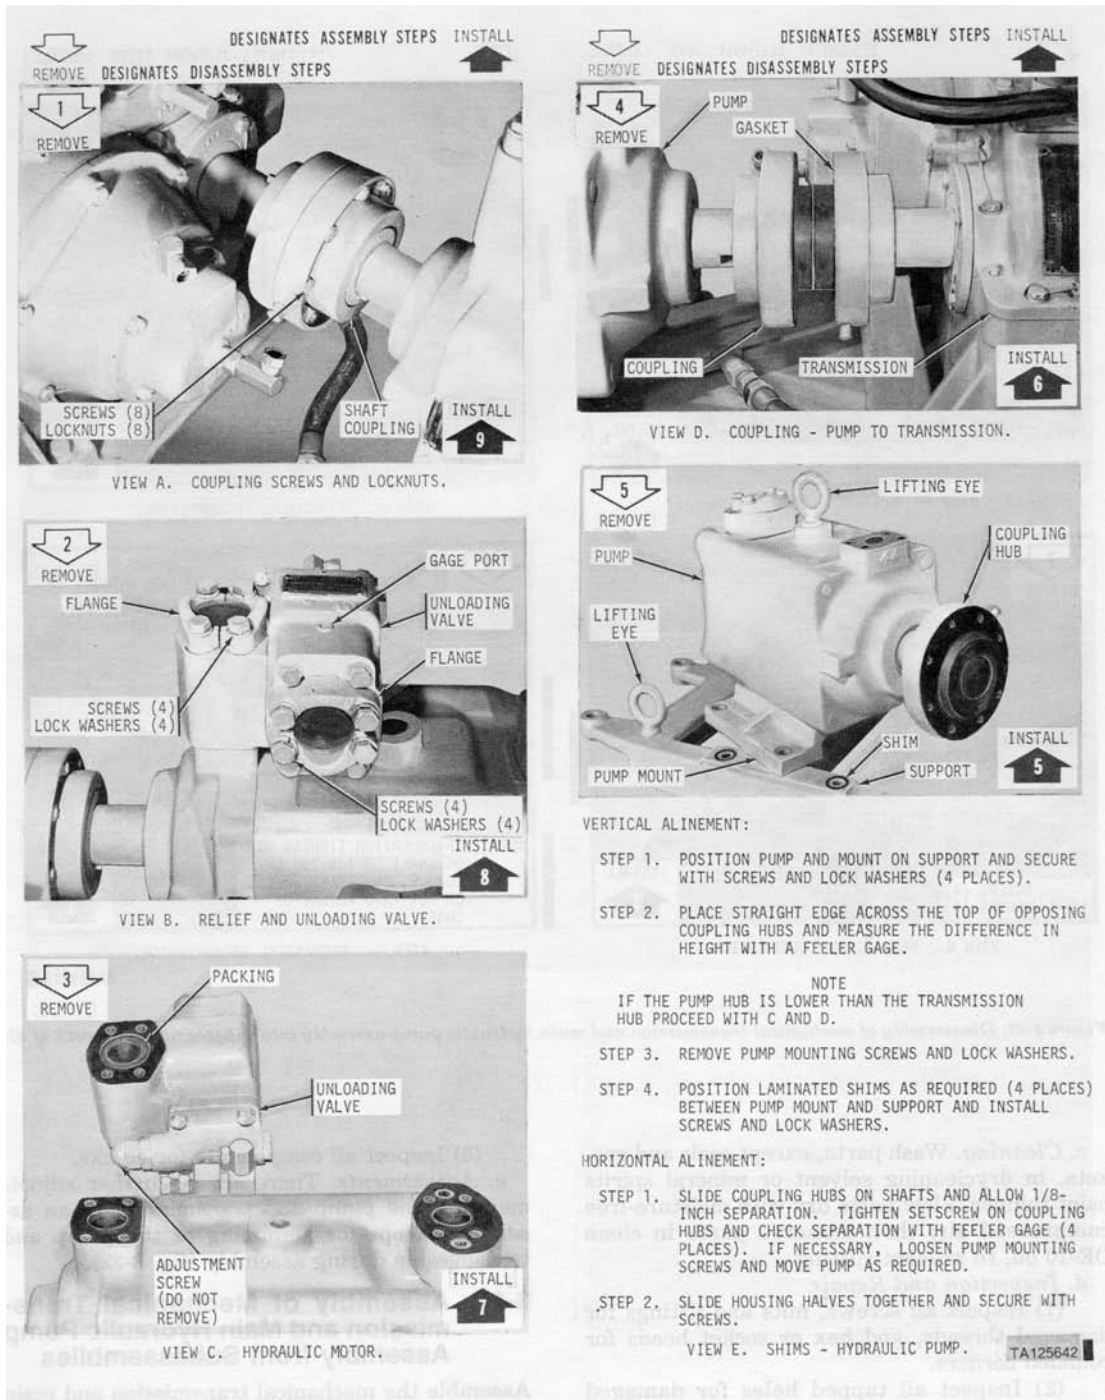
Disassembly of mechanical transmission and main hydraulic pump assembly into subassemblies (Sheet 1 of 2).
